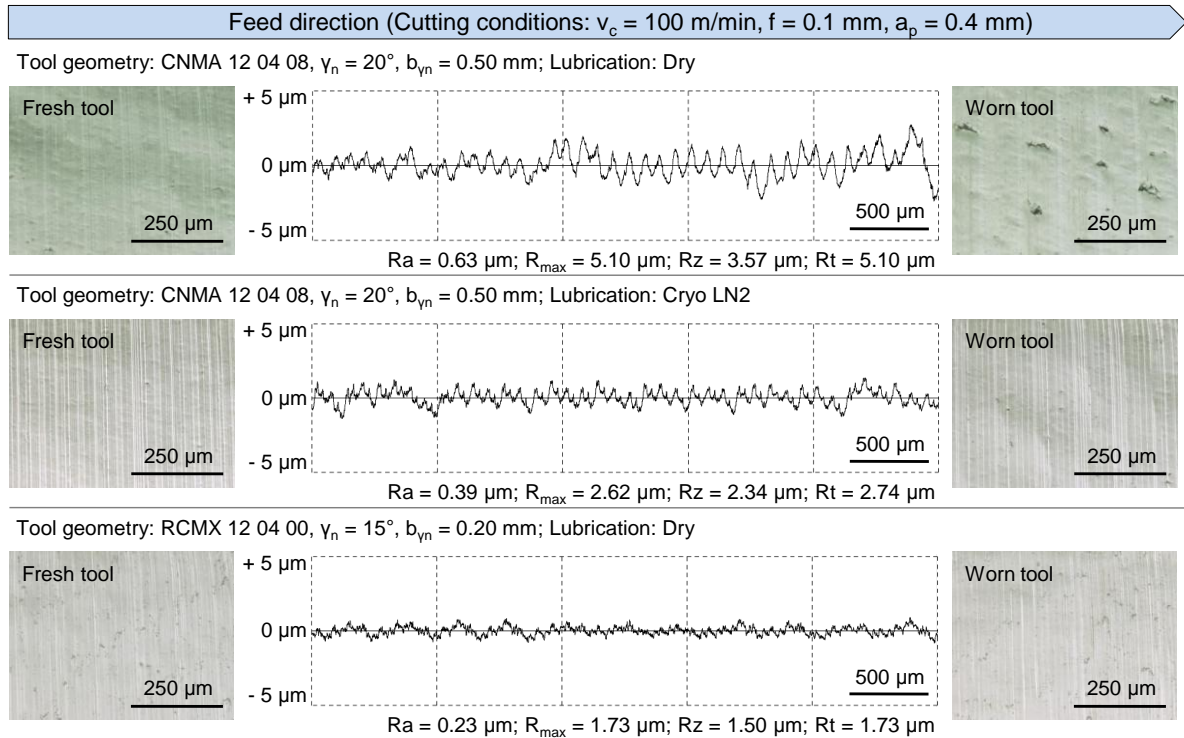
Machined surfaces with fresh/worn inserts and roughness profiles (type R), at fixed cutting parameters.
